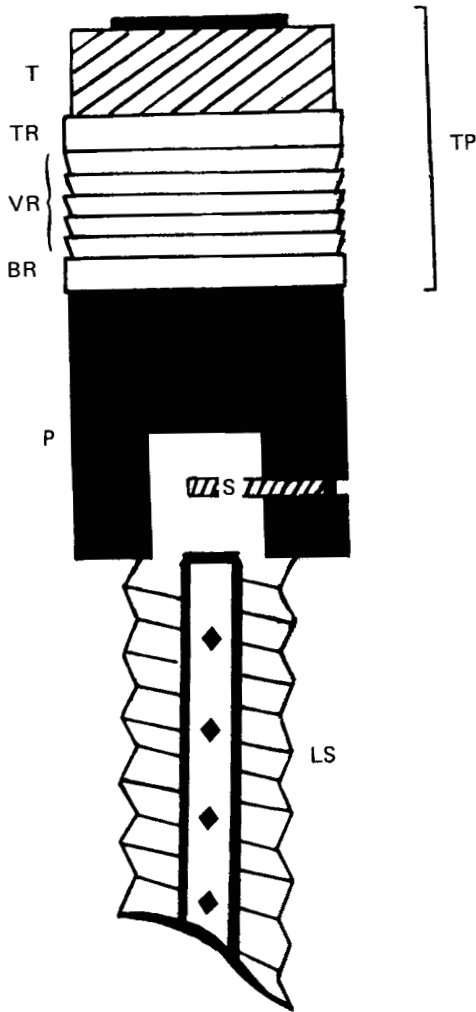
Details of the piston. T : teflon disc; TR : top, V-ring set; VR : v-rings (5); BR : bottom, V-rings set; P : stainless steel body of piston; TP : threaded portion of P; LS : lifting screw; S : retaining screw attaching lifting screw to piston. Diamonds in the lifting screw key slot indicate where numerals are engraved.
